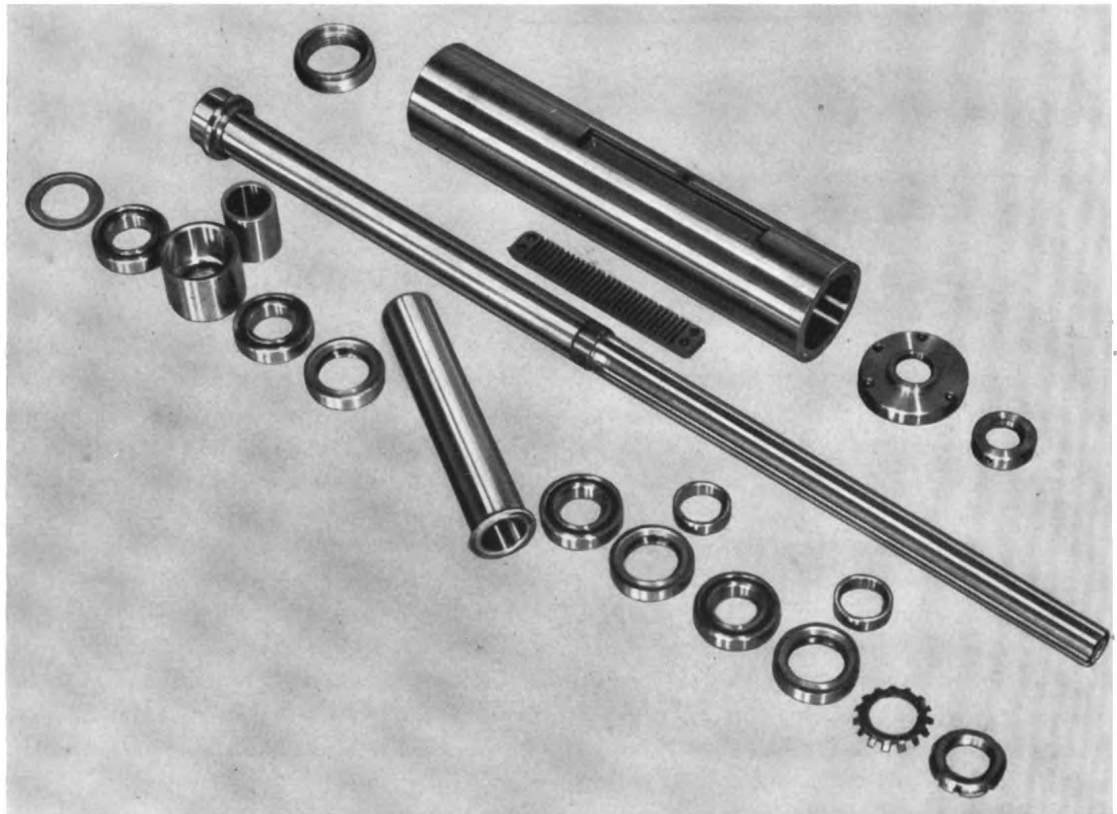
The tool end of the  $1\frac{3}{8}$ " diameter spindle is heat-treated for maximum hardness, the remainder is selectively treated for maximum strength. It is pre-lubricated and sealed for bearing life.
